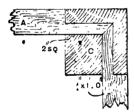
Horizontal Section of Leg and Rails of Box.
